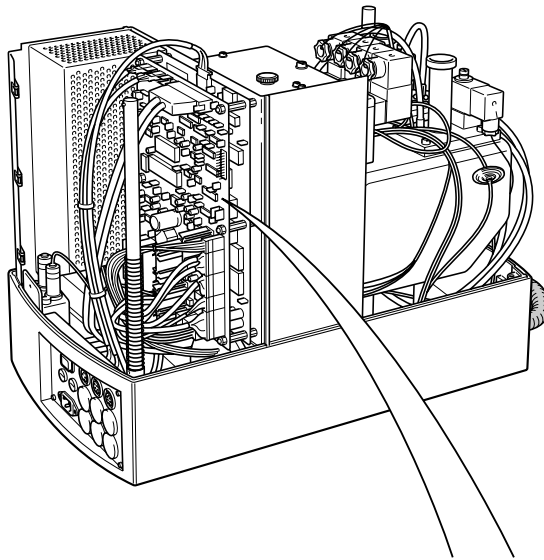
I/O board TP location; Mk 2 (sheet 2 of 4)
